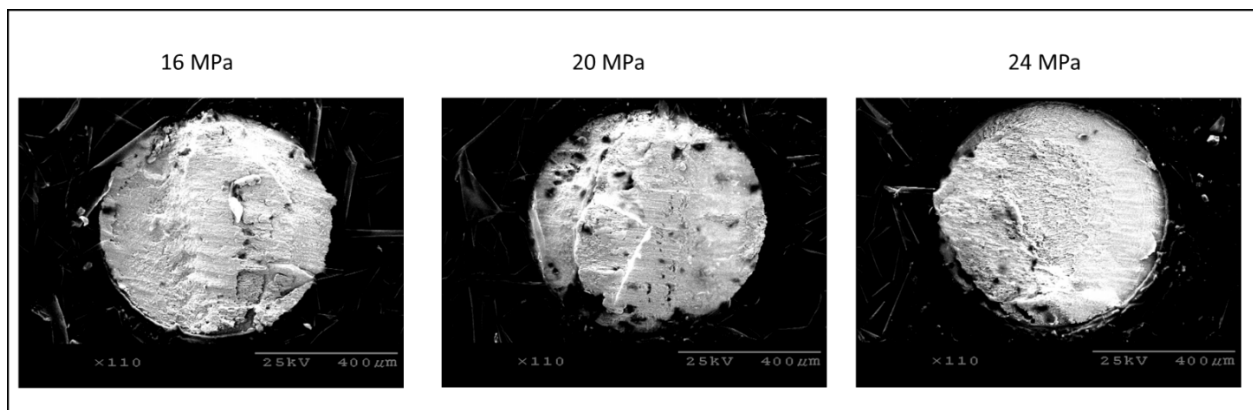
Typical failures at different stress amplitudes for the surfaces of non-aged SAC305 solder joints.
